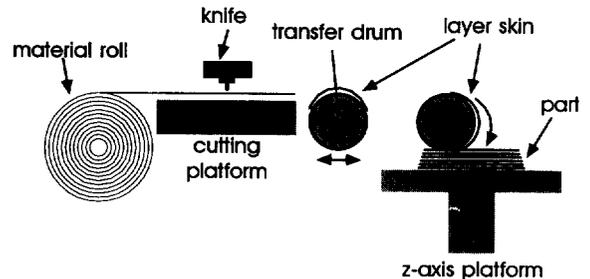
The Genie first cuts sheets of adhesive-backed vinyl and then assembles the cut sheets to build a part.
